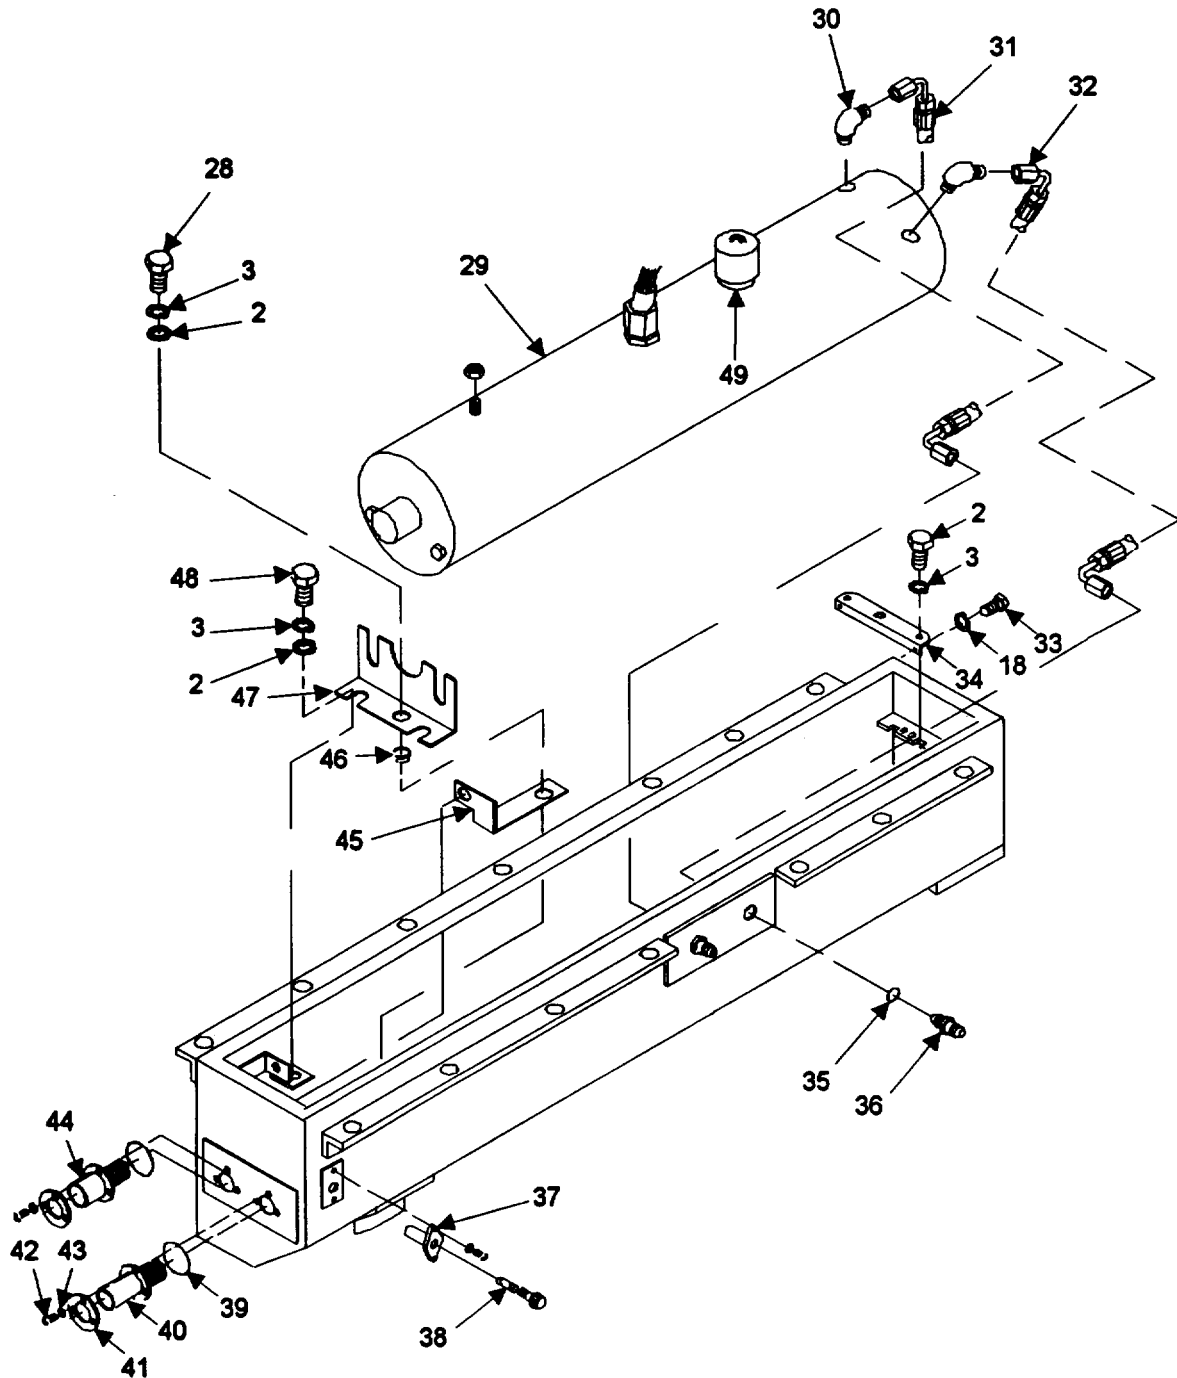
Hydraulic Unit Assembly 9375758 (Sheet 2 of 2)
